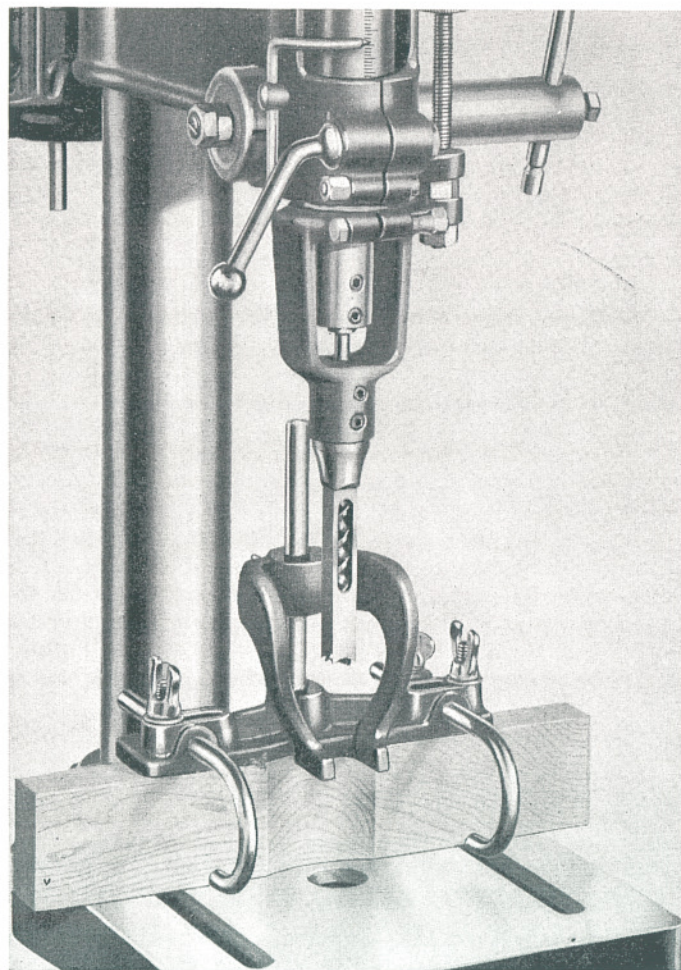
Mortising Attachment No. 976 Mounted on Drill Press.
